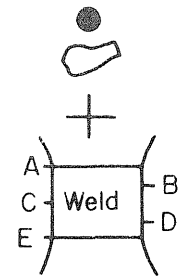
FRACTURE SURFACE, AND ULTRASONIC INDICATIONS RECORDED FOR SPECIMEN ND-20
